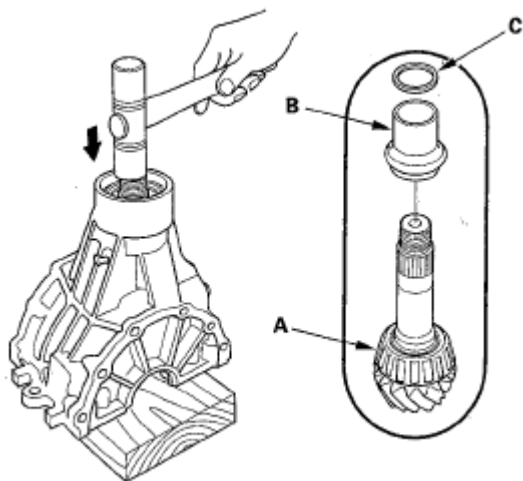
Identifying Drive Pinion, Pinion Spacer And Thrust Washer
